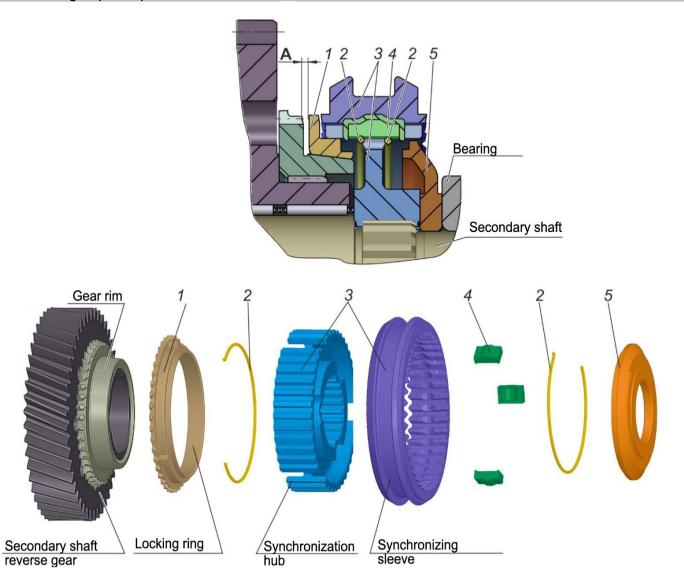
Reverse synchronizer: A = 1.1 - 1.5 mm; 1 - locking ring; 2 - synchronizer spring; 3 - synchronizing sleeve with hub; 4 - synchronizer T-block; 5 - thrust washer.
